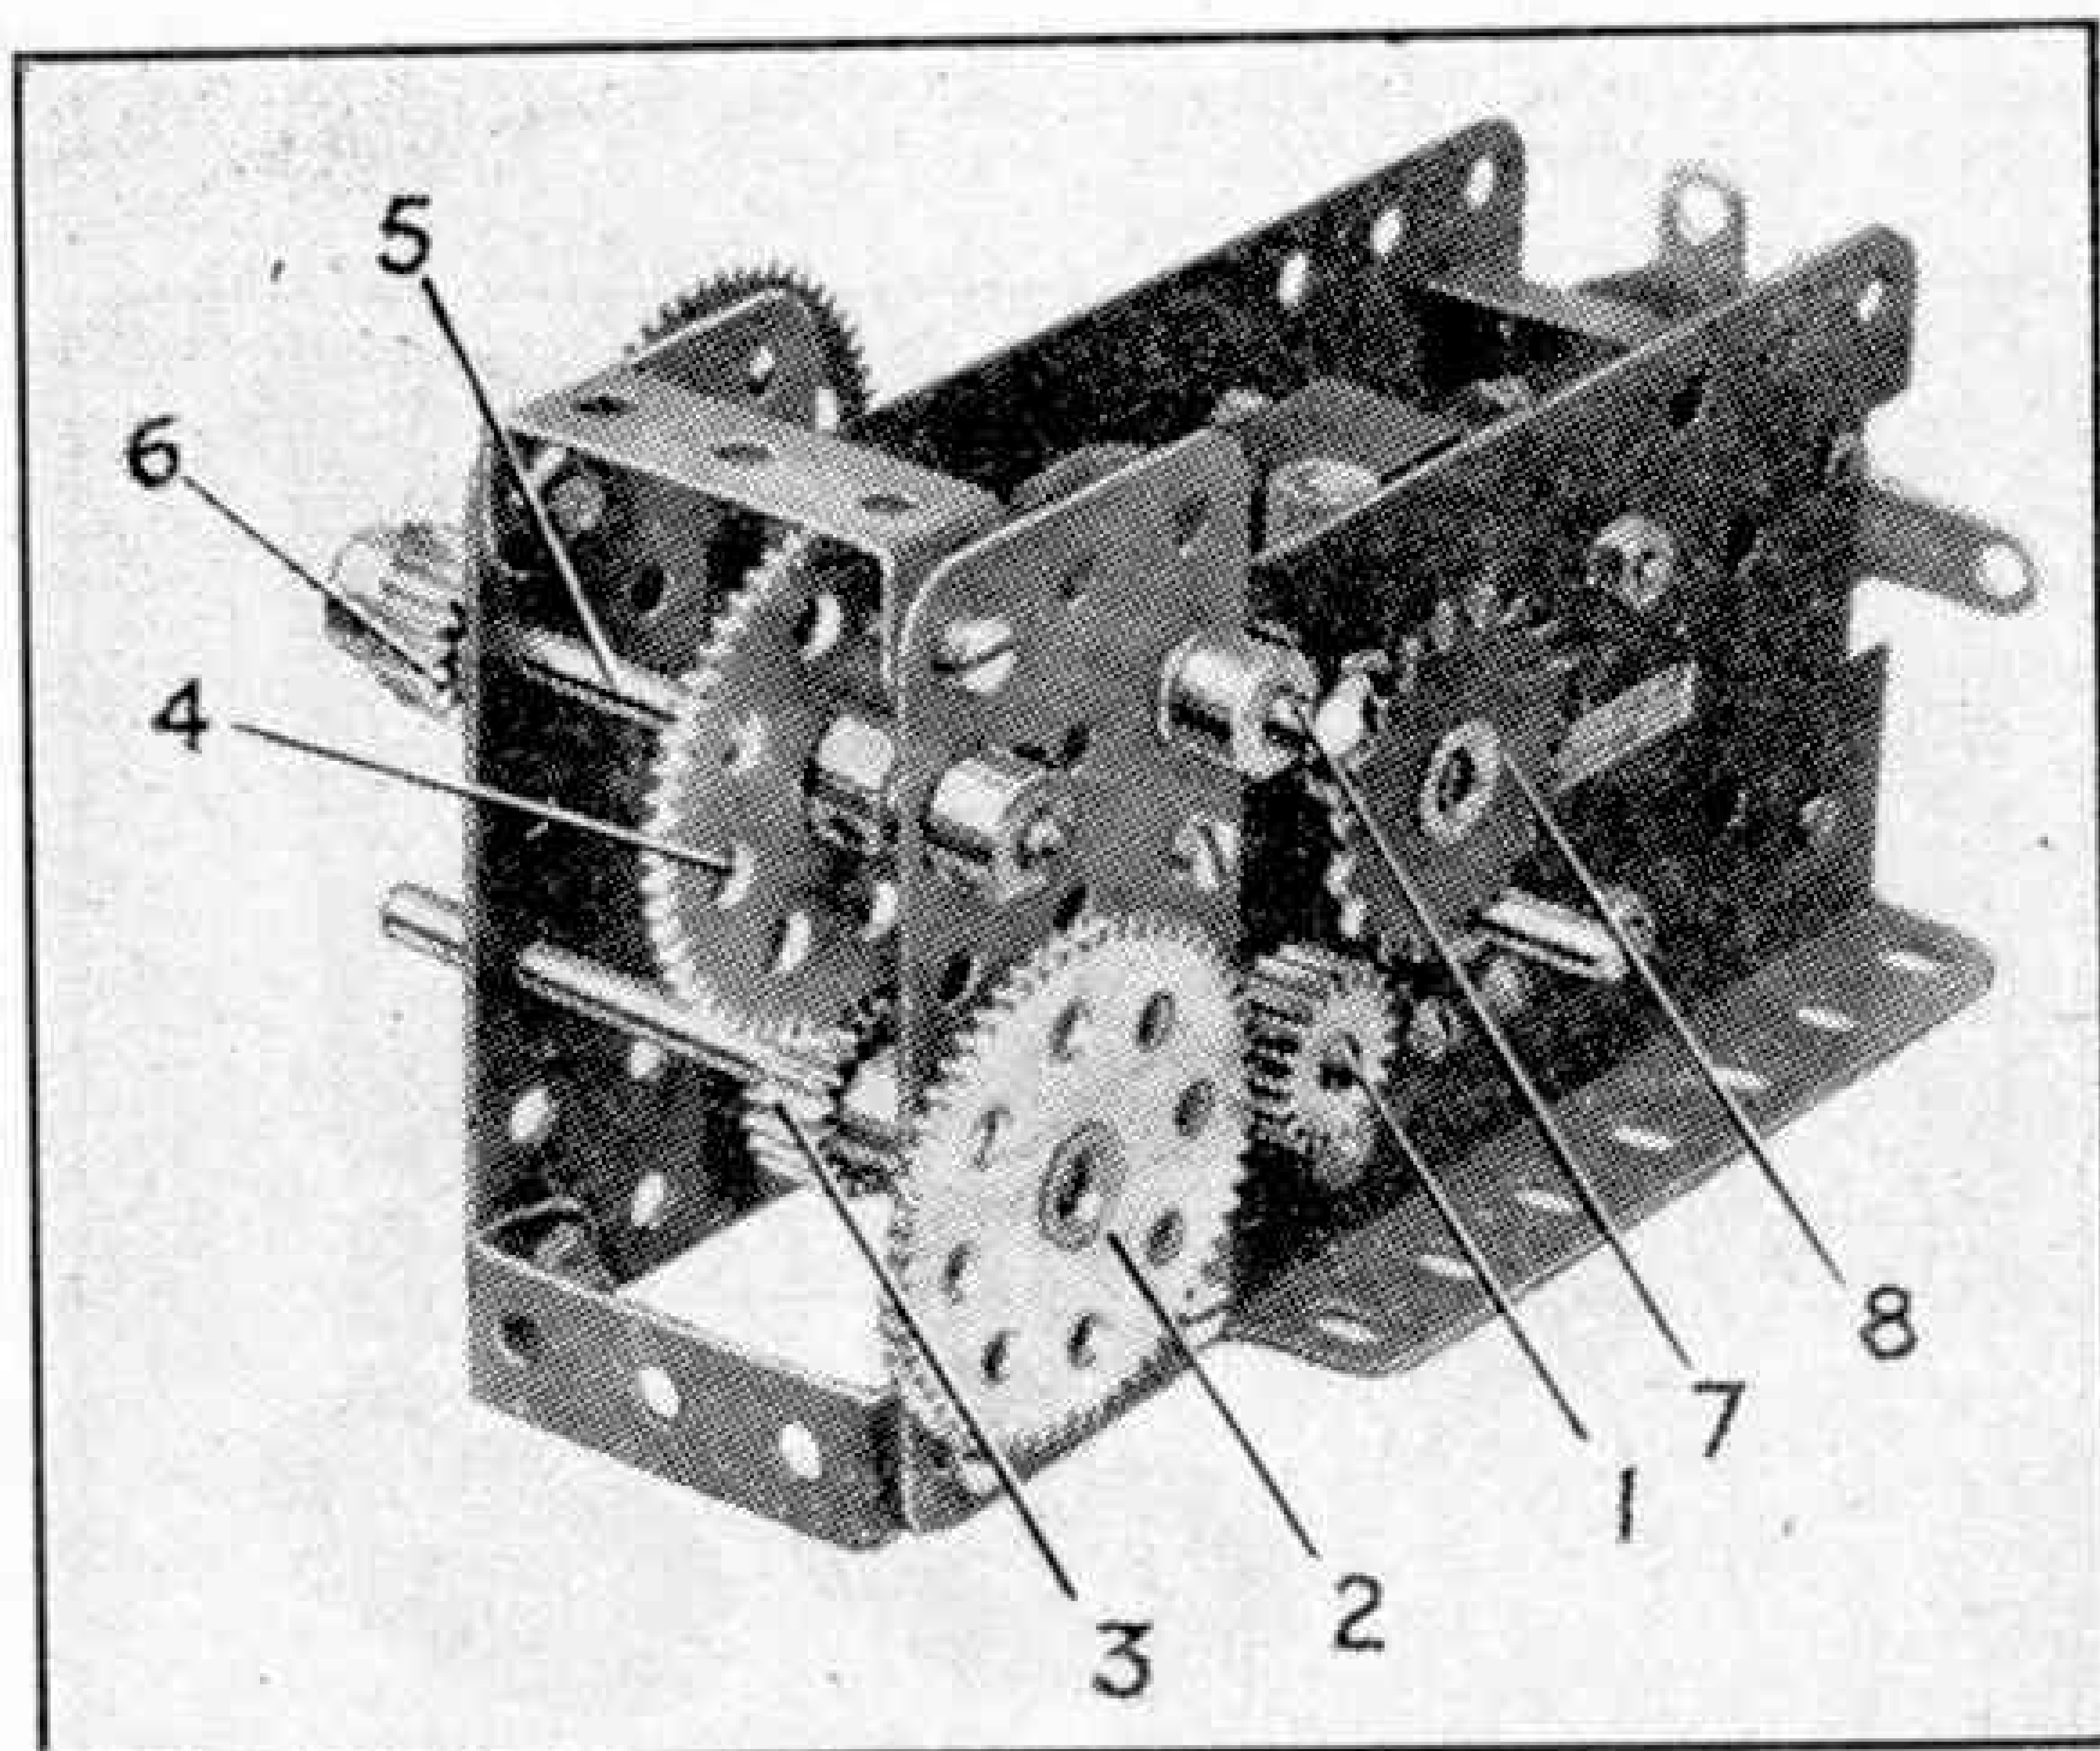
An E20R Electric Motor and reduction gearing assembled as a complete unit. The gears fitted give a total reduction ratio of 81:1.
